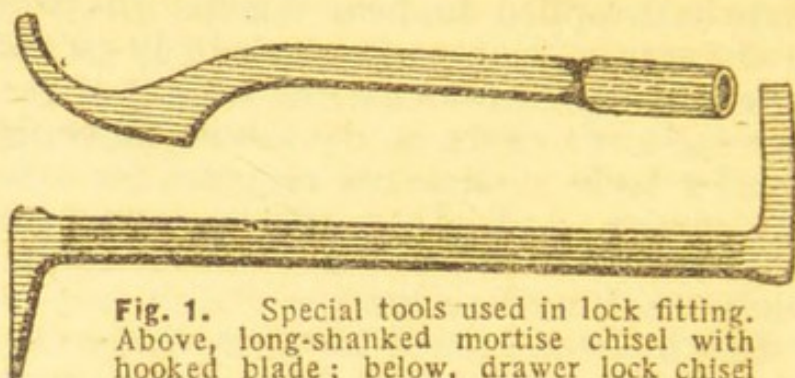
Special tools used in lock fitting. Above, long-shanked mortise chisel with hooked blade; below, drawer lock chisel
